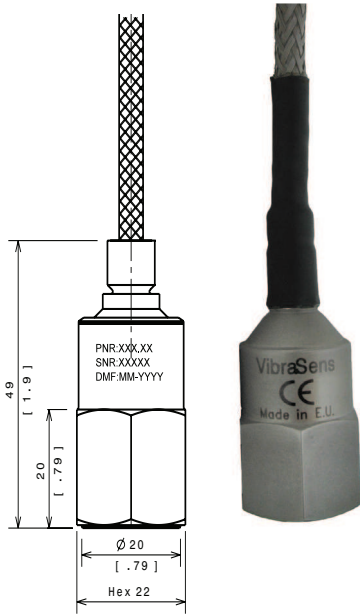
Outline drawing B=7 (cable with overbraided electrical layout : See above B=5)
